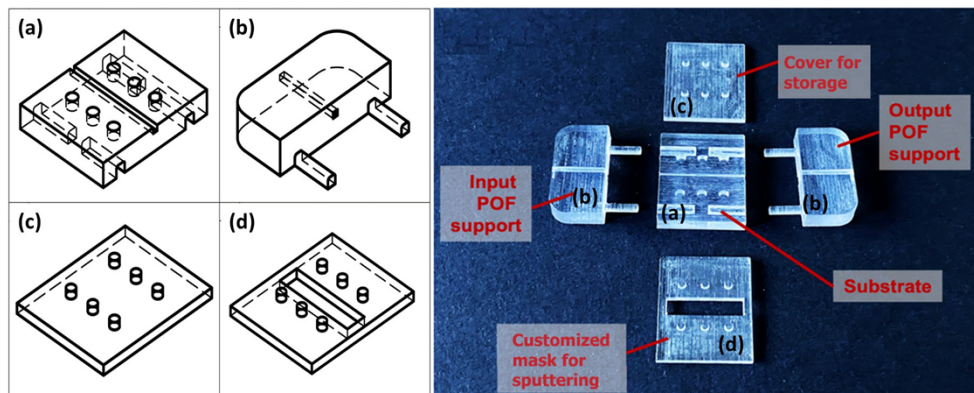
CAD design and 3D printing of: (a) substrate; (b) plastic optical fibers' supports; (c) cover for storage; (d) customized mask for sputtering.
